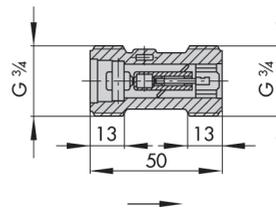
Dimensions in mm · Accessories for the electric actuator with process controller (connections)
